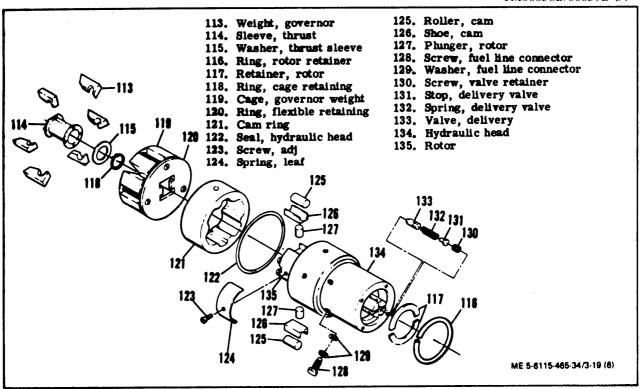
Fuel Injection Pump, Exploded View (Sheet 6 of 7)
